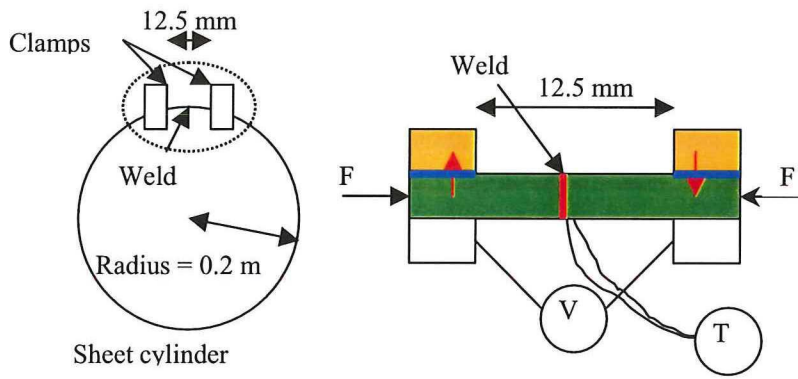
Welding set up, left the rim welding set up, at the right hand side an enlarged view of the clamps and weld zone, which is indicated by the dashed oval in the left hand side picture
